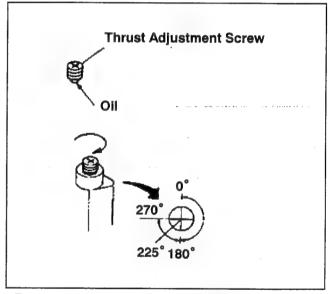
Adjustment of Thrust Adjustment Screw
